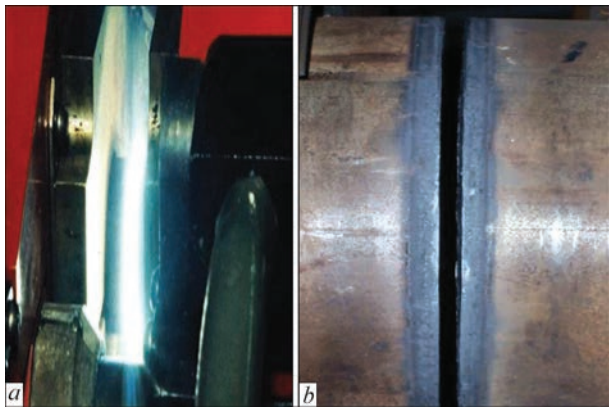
Pipe welding process, where: *a* — MIAB welding; *b* — pipe butts after heating
